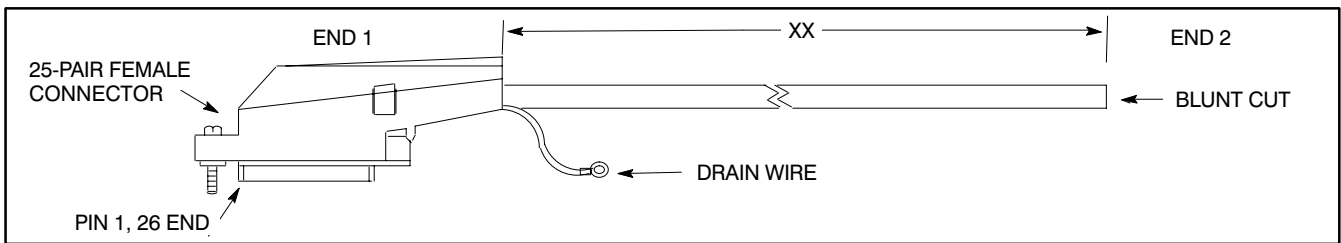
Shelf Connecting Cable Stub Assembly — 003-2975XX
